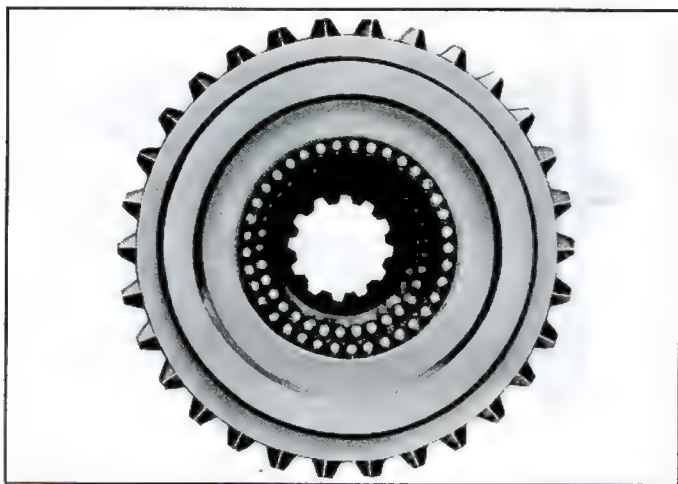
B-15—Mainshaft Roller Bearings Installed in Clutch Gear
